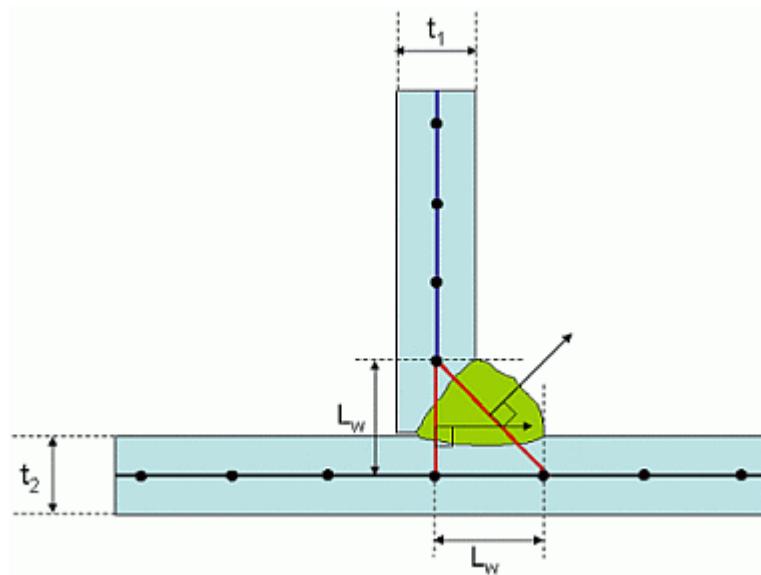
Cross-section of fillet weld modeled with single inclined element
